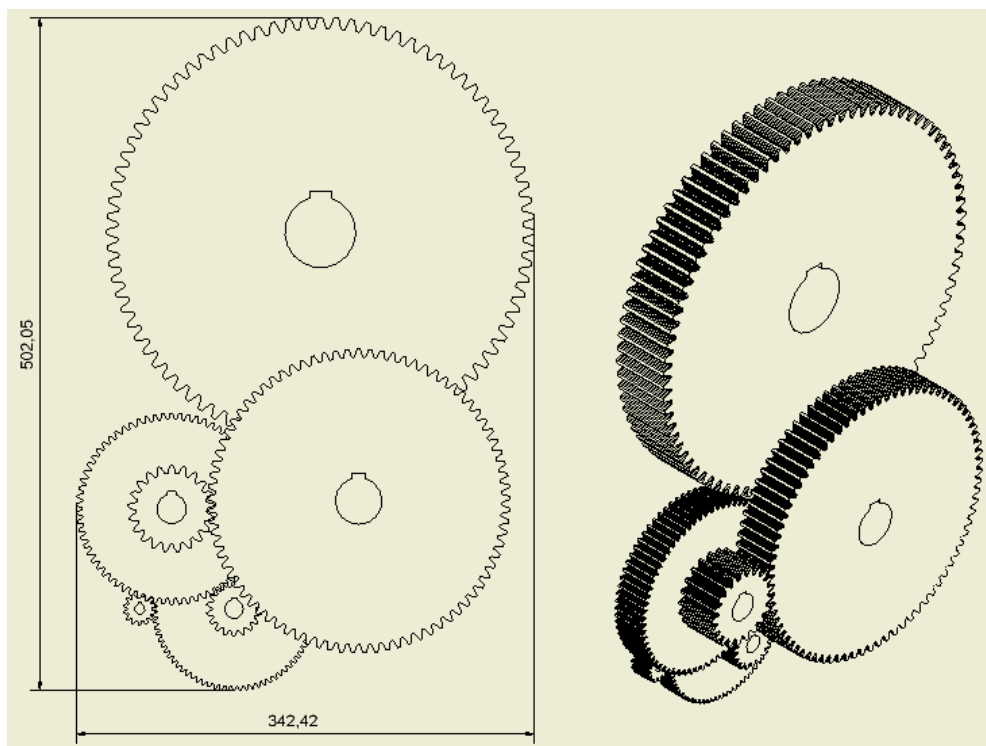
Configuration design of compact gearbox, front and isometric view
